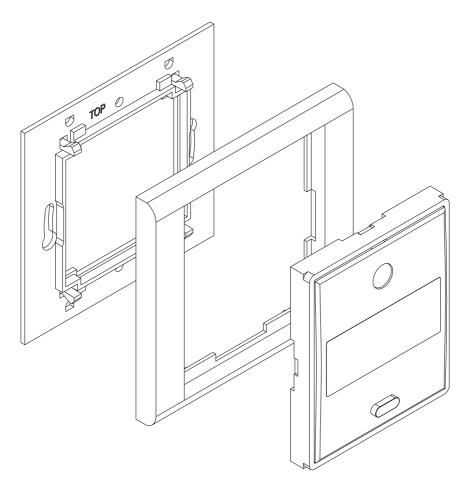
The assembly of the design part of the <u>C-RI-0401R-Time</u> module
